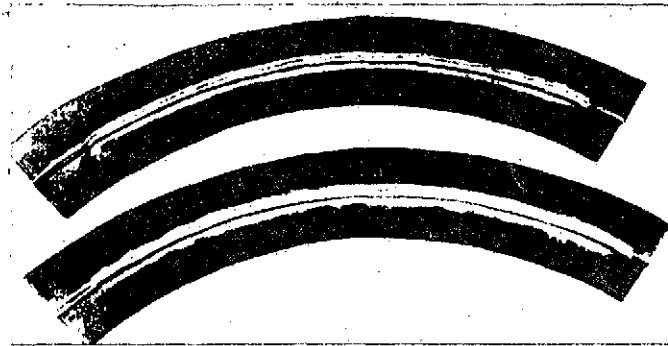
Samples of welded joints produced in space on board a flying laboratory.
